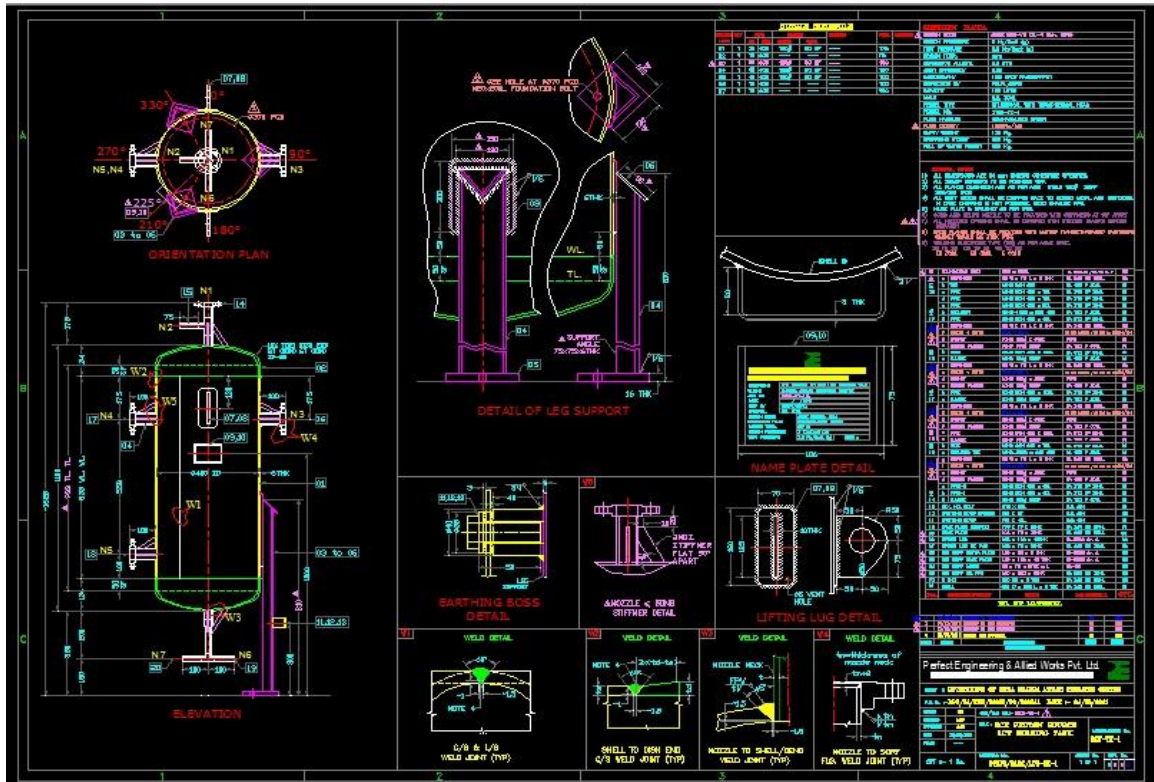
ECR Proton Source LCW Holding Tank, Fabrication Drawing
